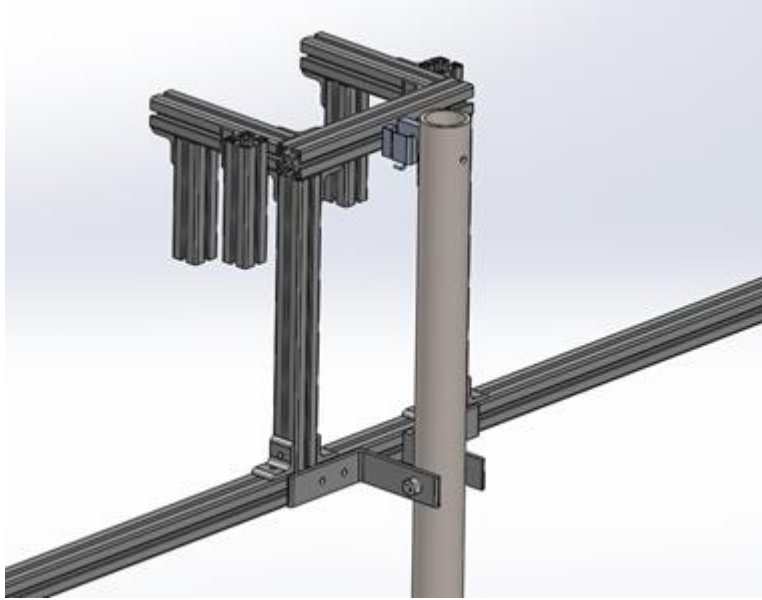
Mounting design of the strut when it is attached to the Tow Tank
